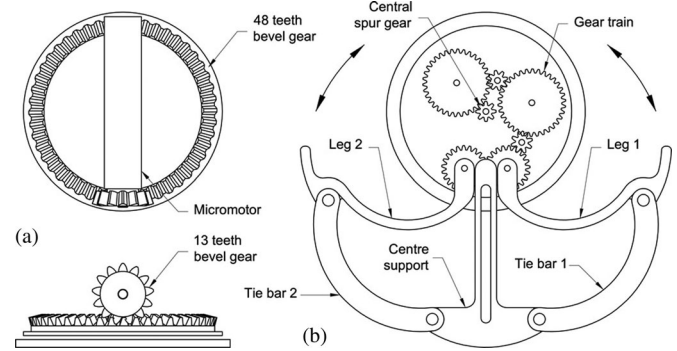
Holding mechanism design showing: (a) 13 teeth and 48 teeth bevel gears set and (b) gear train and legs in the fully extended position. The central spur gear is driven by the 48 teeth bevel gear.
